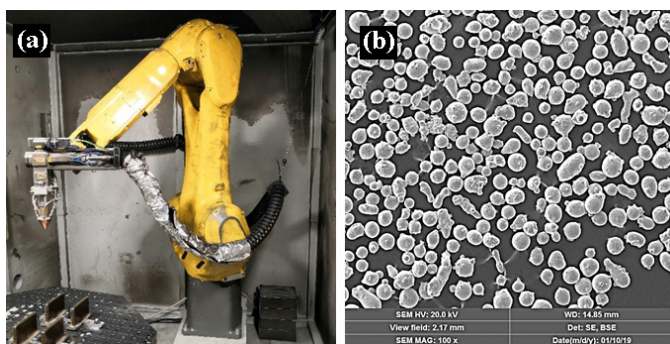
Robotic complex for direct laser metal deposition (a) Scanning electron microscopy (SEM) images for the Inconel 625 powder used during the experiment (b)
